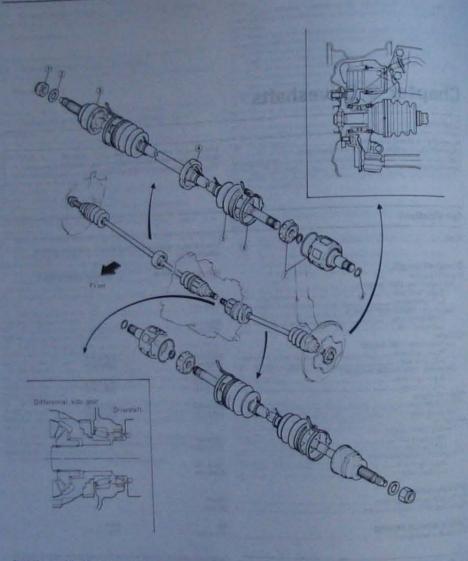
Layout of the driveshaft assemblies and related components - manual transmission and early automatic transmission models (Sec 1)
